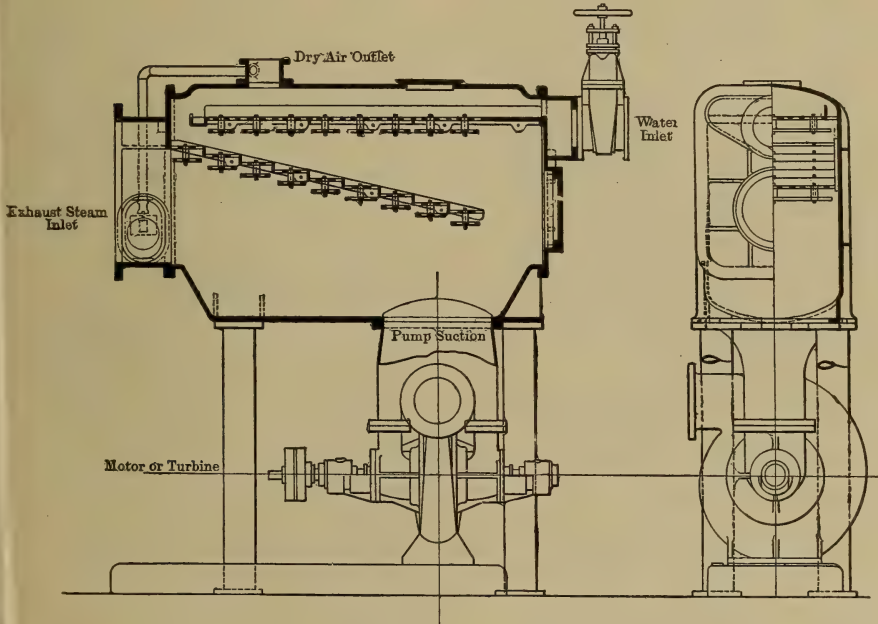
Wheeler Low-head Centrifugal Jet Condenser.
